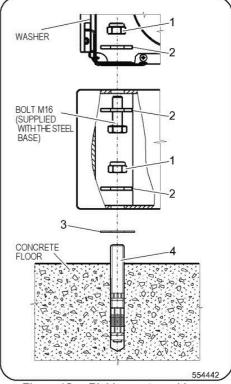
Rigid-mount machines, Installation on a steel base and floor
